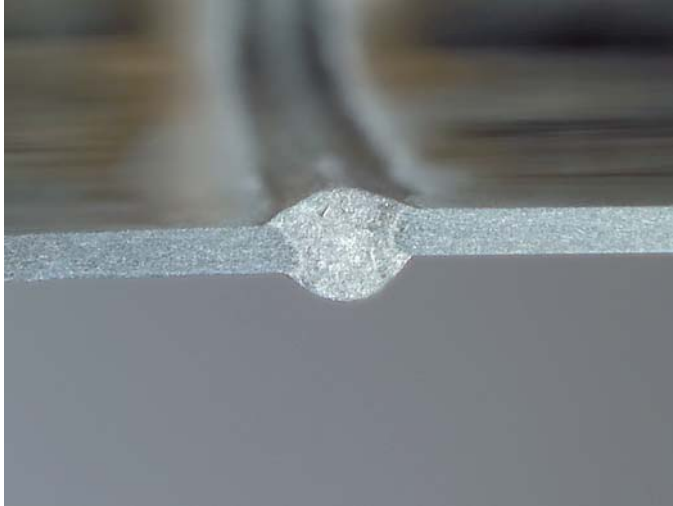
Butt-weld between two AIMg3 sheets with a thickness of only 0.8 mm: CMT-welded without using any clamping, holding or weld-pool backing devices.
